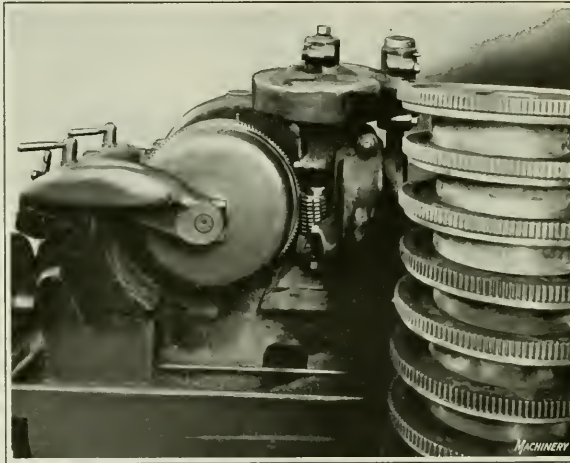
Cutting Spur Gears with a Multiple-threaded Hob
